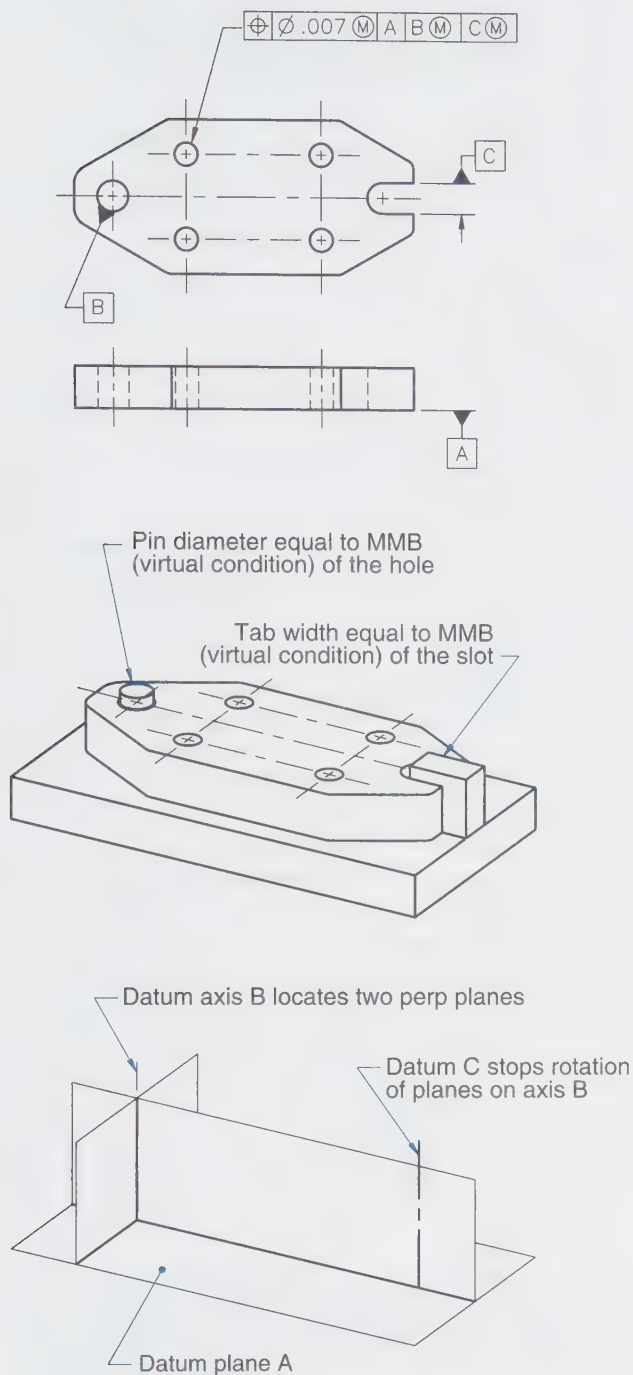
A primary datum surface and secondary datum feature of size may be used to establish the datum reference frame with a tertiary datum feature of size used to set the orientation of the datum reference frame.
